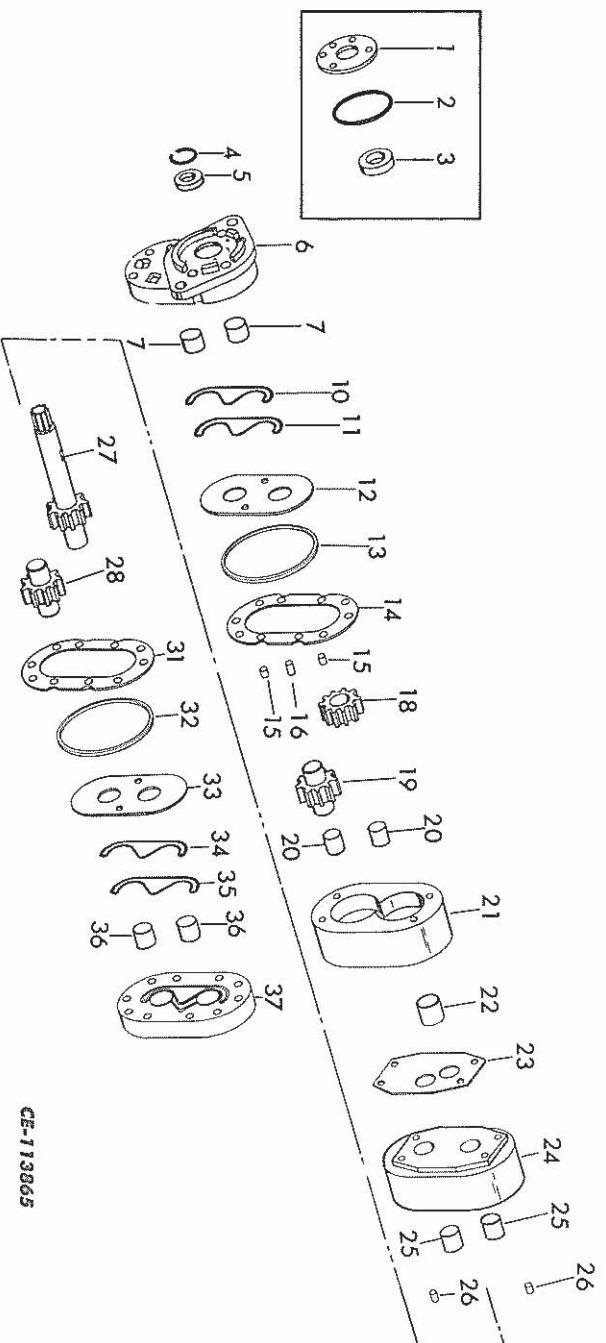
Charging Pump (Intermediate and Latest Models)
